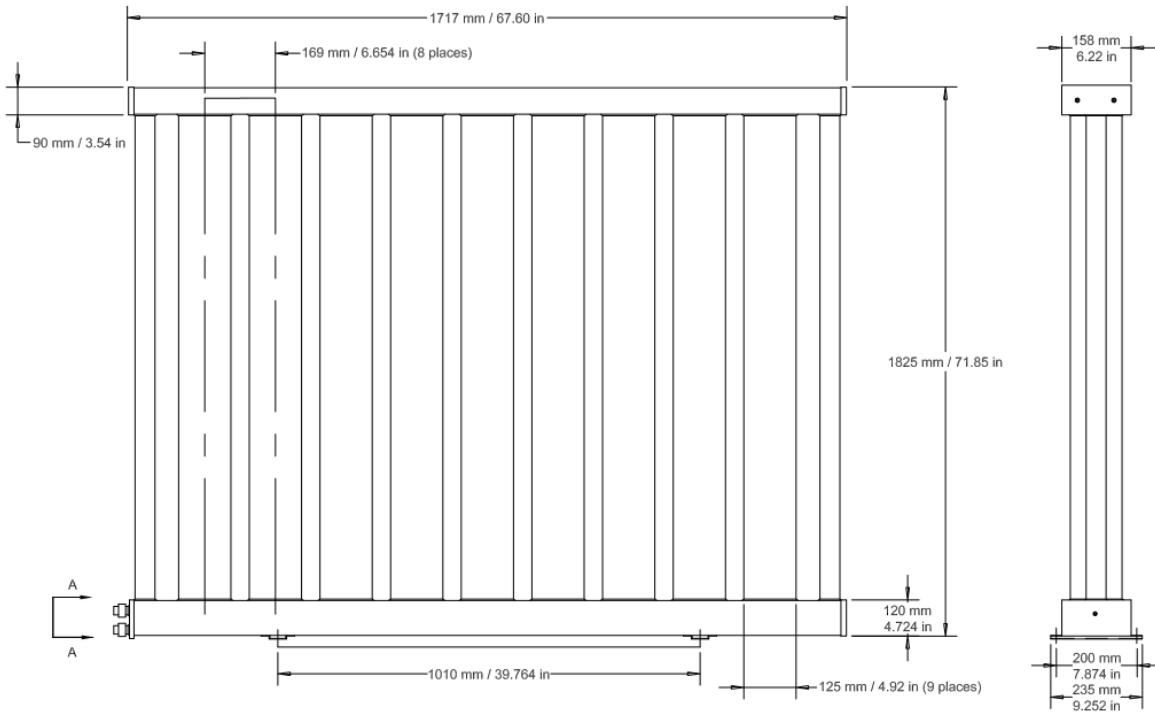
SHP609-E unit diagram showing the design and dimensions.
